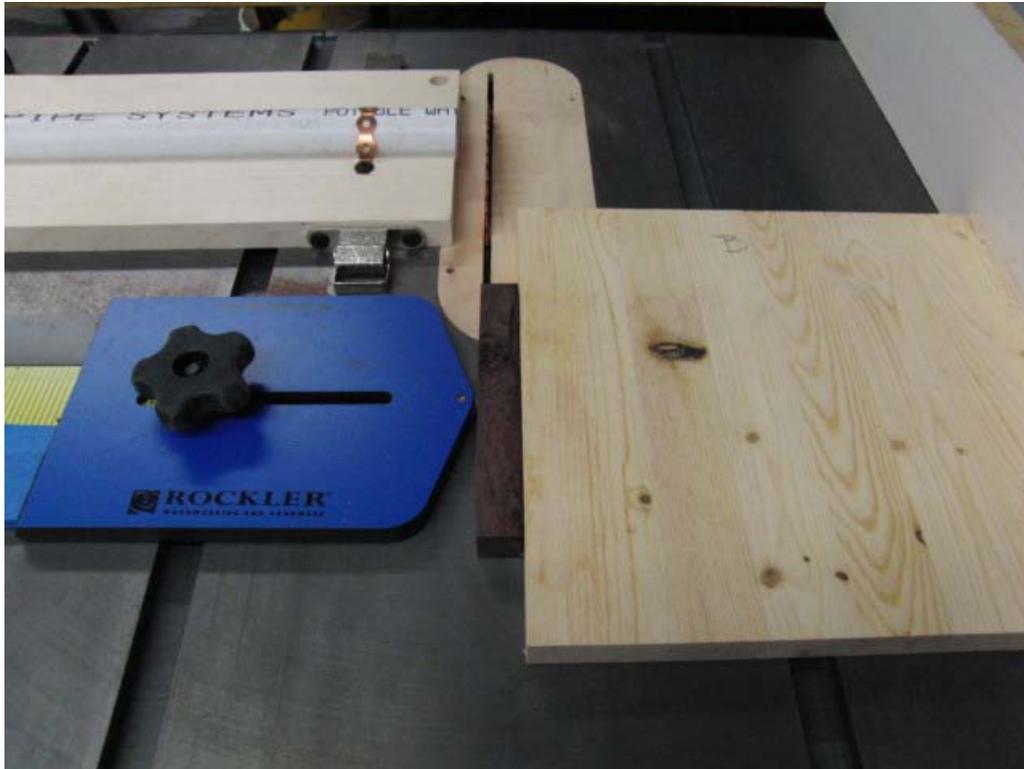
adjust the Rockler jig to cut the thickness you want. In this case I would like to have mine about 1/32". Proceed to cut.
